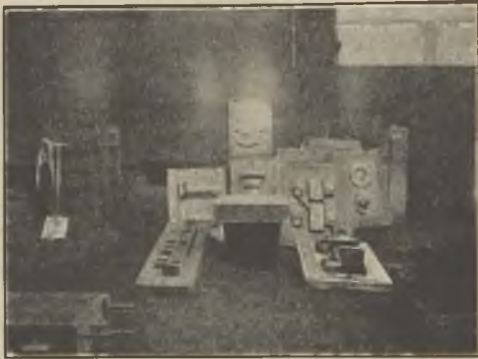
SHOWING VARIOUS PATTERN BOARDS AND TYPE OF JOLT MACHINE USED.
